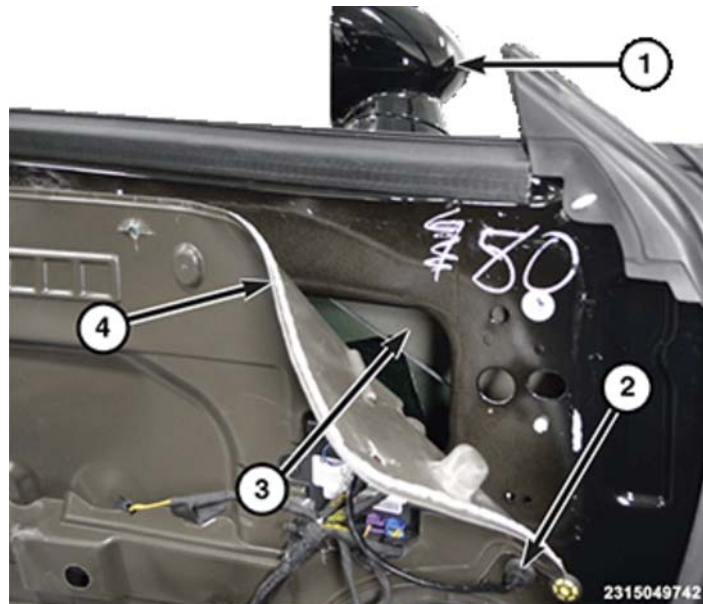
Outside Rearview Mirror, Wire Harness Grommet, Opening & Watershield
